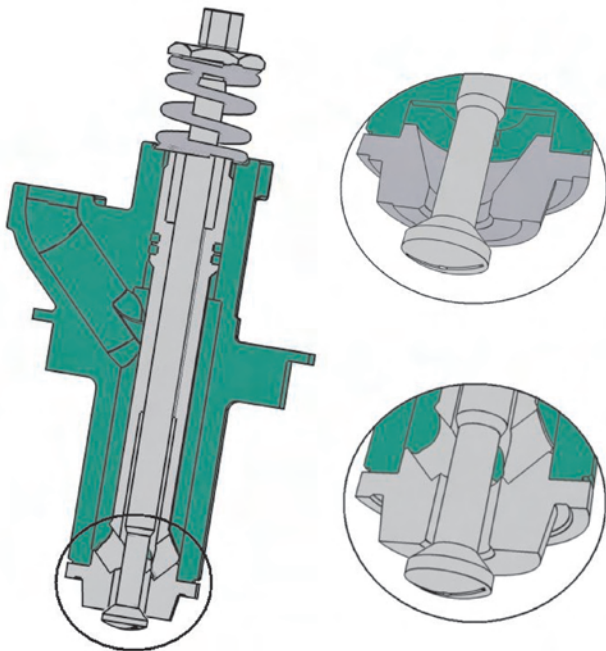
Injection valve used in motor compressor series GMVH, a – old version, b – new version (with swirl)
